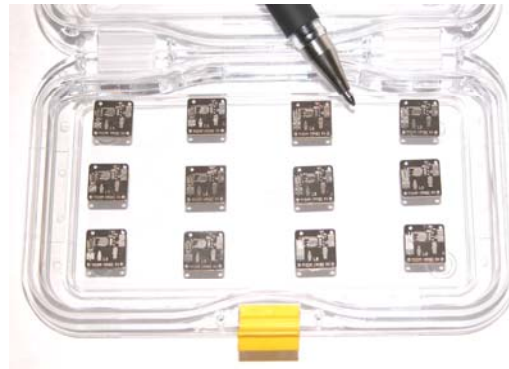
Twelve MEMS S&A mechanism assembled via the micro-assembly process.
